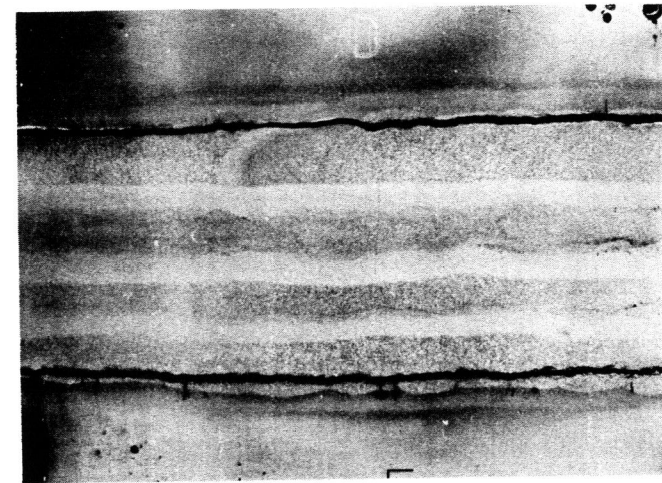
General view of the cracking on the surface of the mild steel pipe-pipe weldment when the test was terminated at 23671 h.
